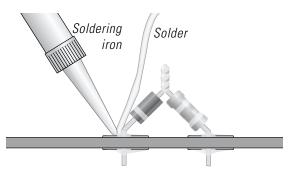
Soldering the zener diode and resistor to the circuit board. On the RMX 2450, the components can be soldered on the top side of the board as shown; on the RMX 850 and 1450, they are soldered on the underside.
